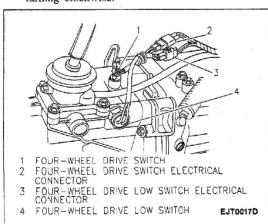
Four-Wheel Drive Low Switch Location (If Equipped)
